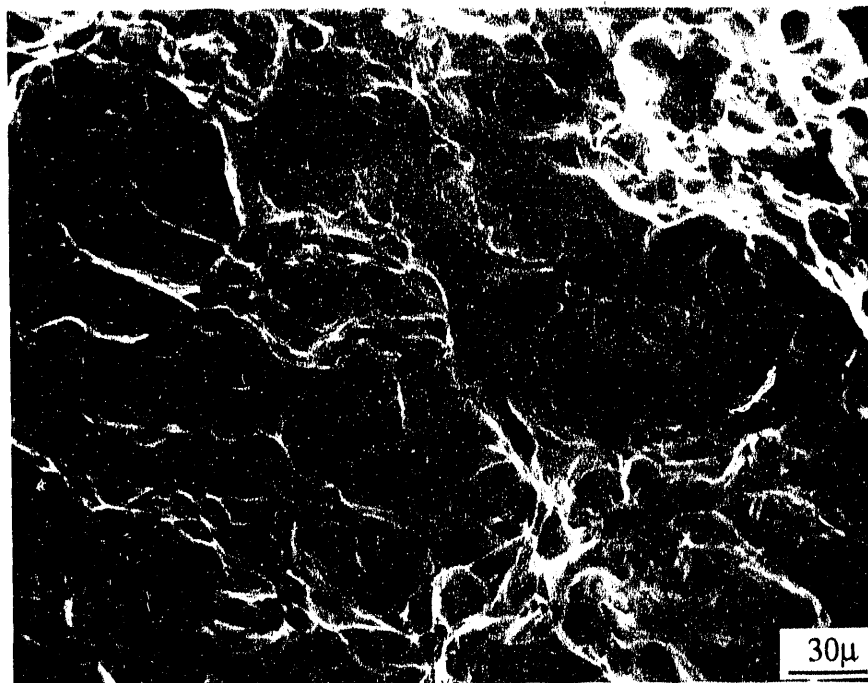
Fracture surface morphology of HD 556 hot ductility sample tested for on-cooling at 933°C.
